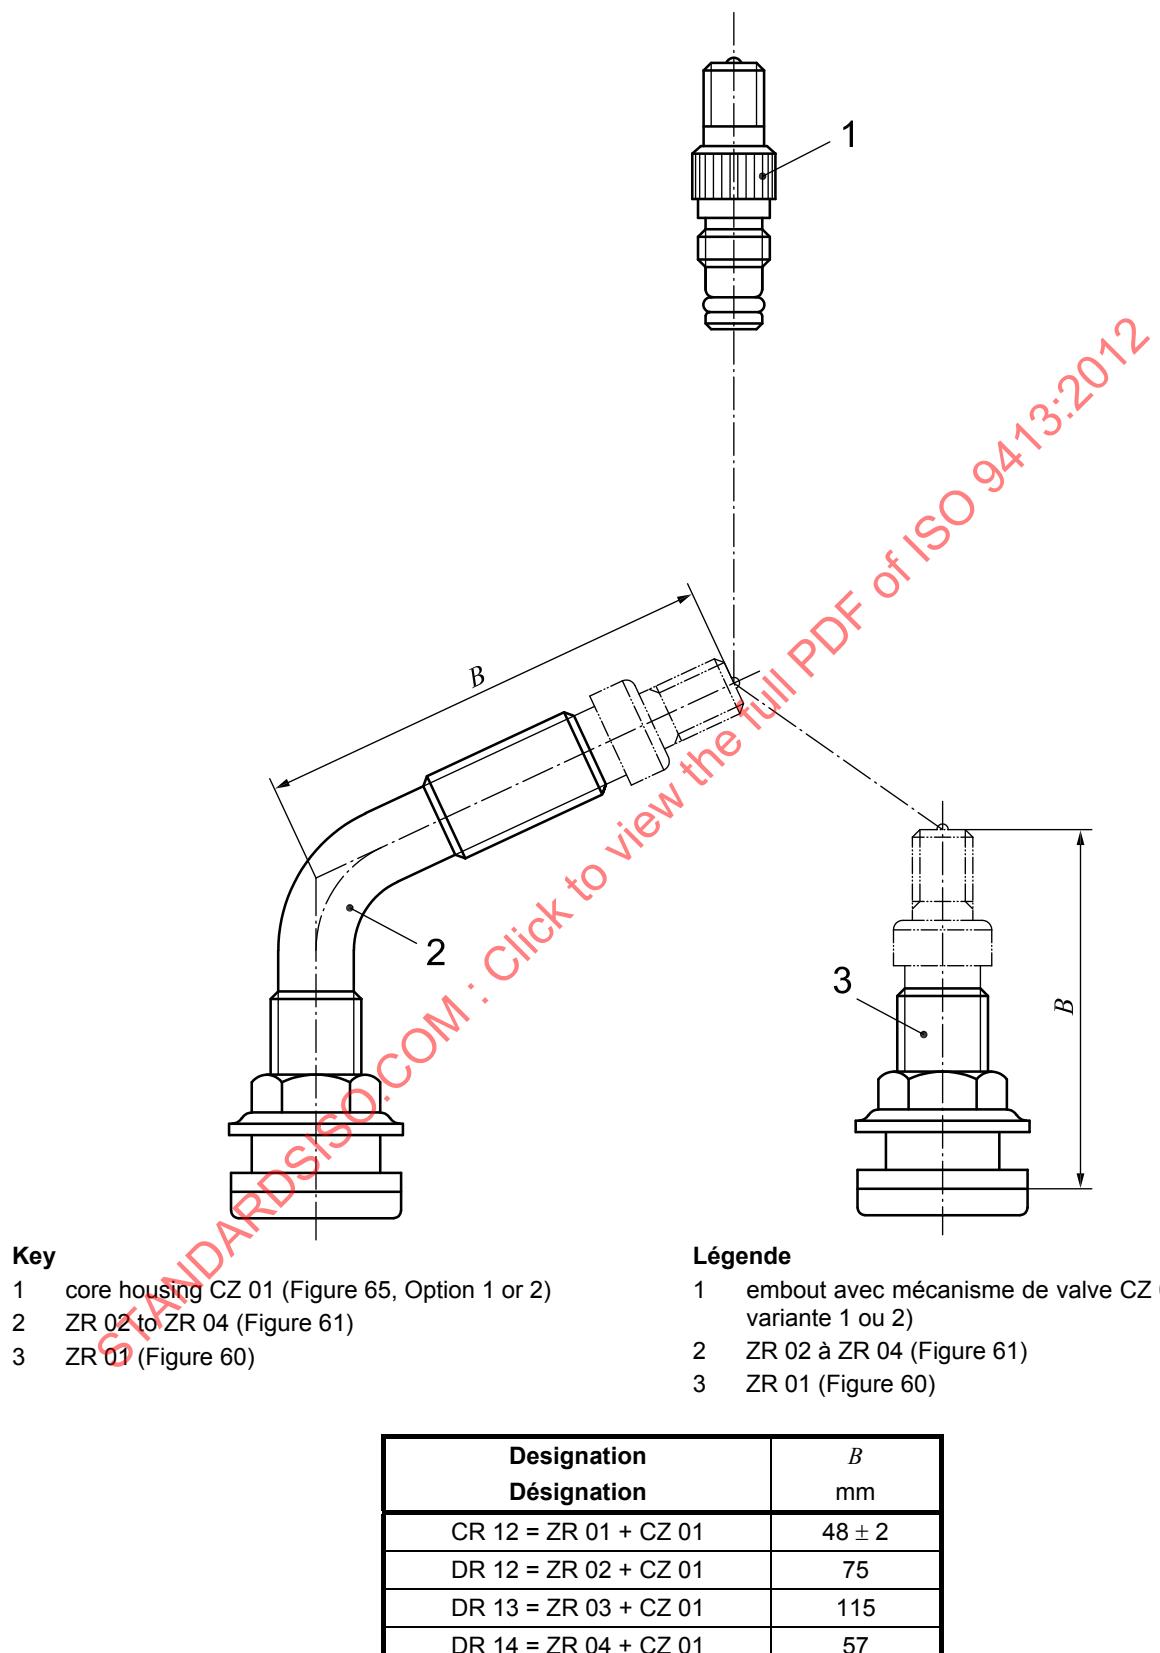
Mounting for tubeless air/liquid valves for valve hole  $15,7^{+0,4}_0$
